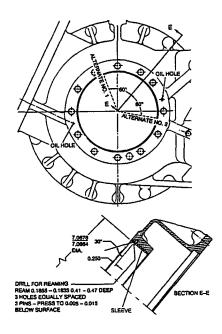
Location of input transfer drive gear support sleeve retainer pins
